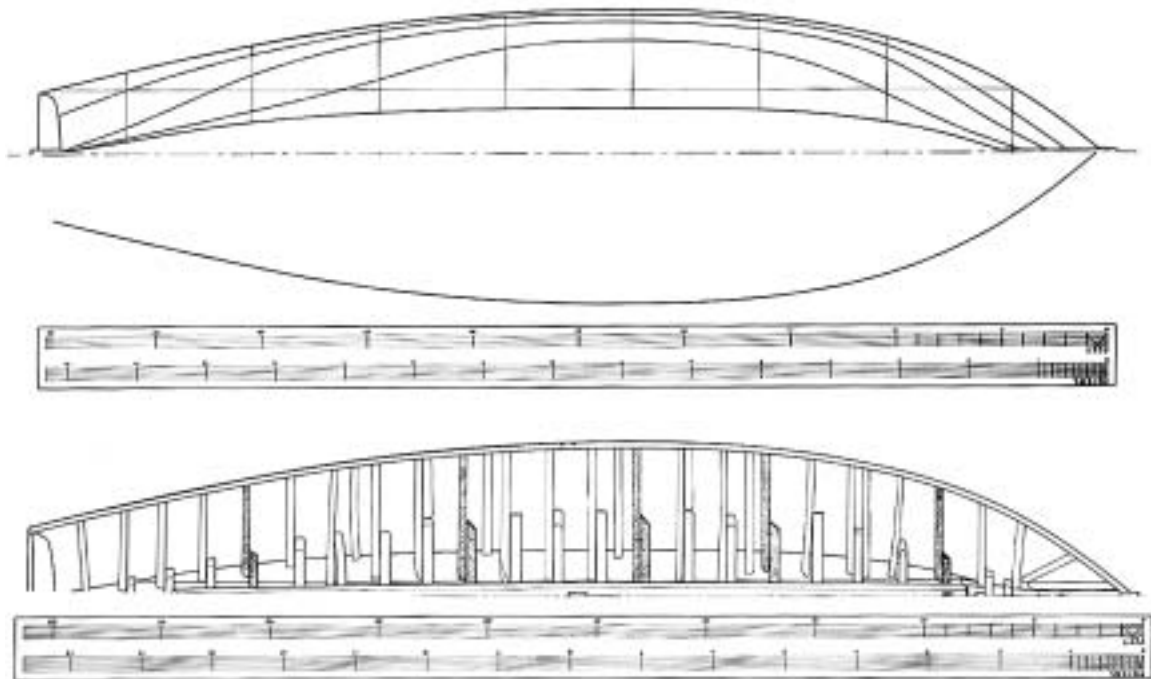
Breadth plan Lines drawings (top) and from Construction plans (bottom) [After Steffy 1994, Fig. 5-42, 5-43].
